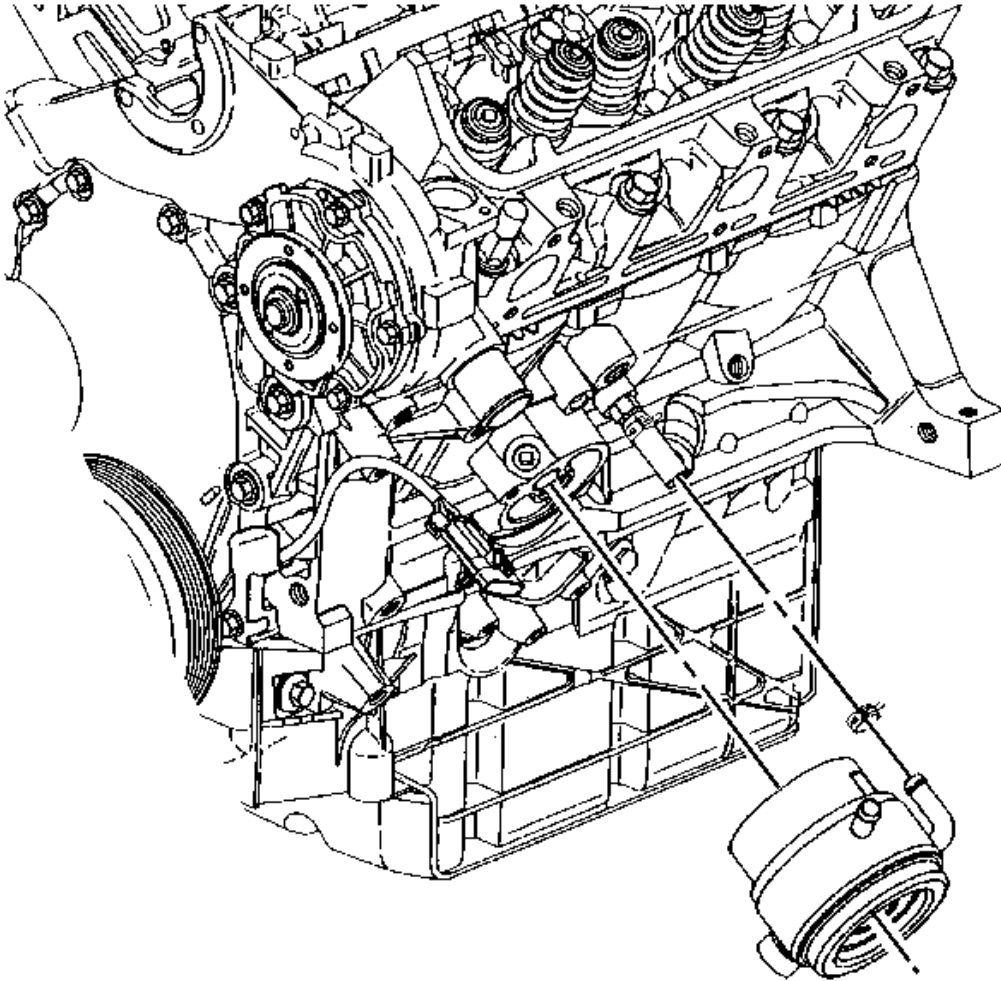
View Of Oil Cooler Inlet Hose Clamp & Oil Cooler
